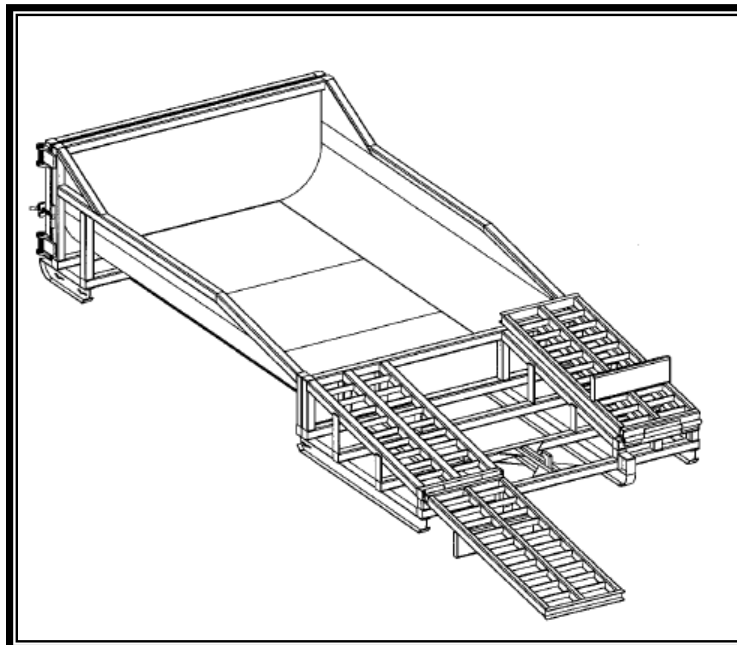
Prefabricated Concrete Washout Container with Ramp.
